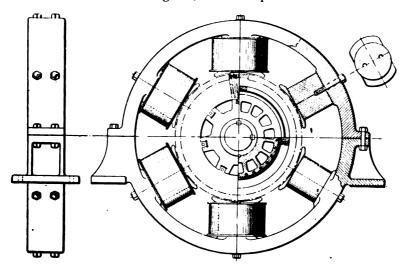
Magnet-Yoke with Parts Bolted Together at Sides of Ring.
